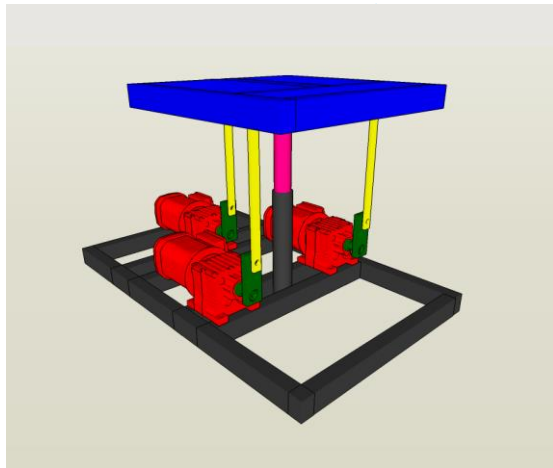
CAD design of the rotational 3-DOF motion platform.
